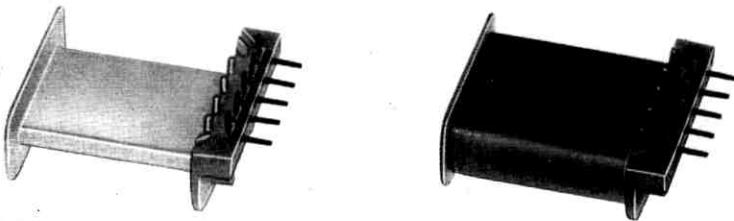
BF relay coil bobbin (left) and coil assembly (right).
